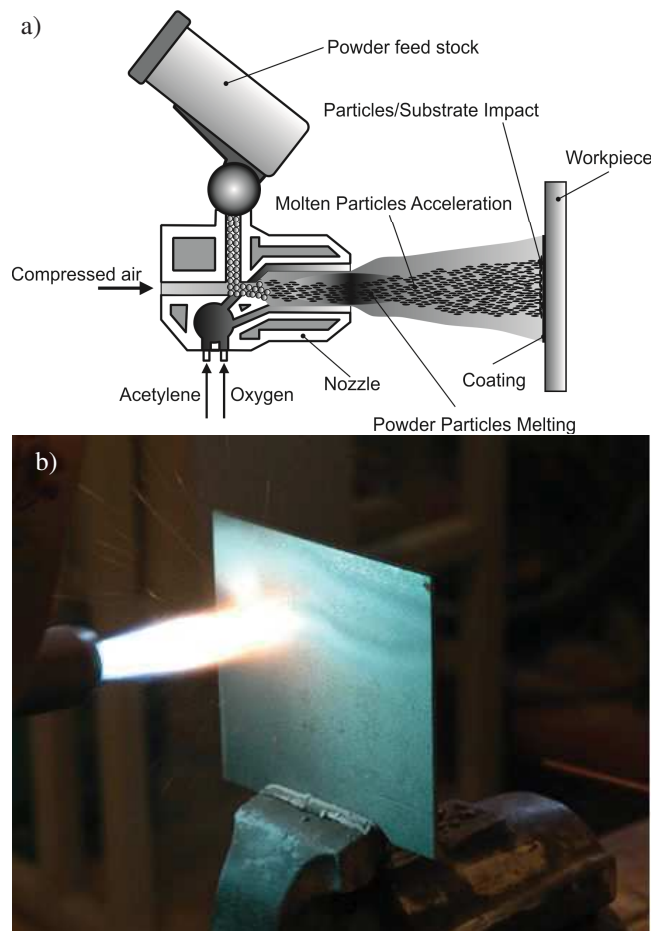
Flame spraying process: a) a diagram of handheld flame jet burner; b) a photo from trials of flame-spraying aluminium coatings with CastoDyn DS 8000 burner
